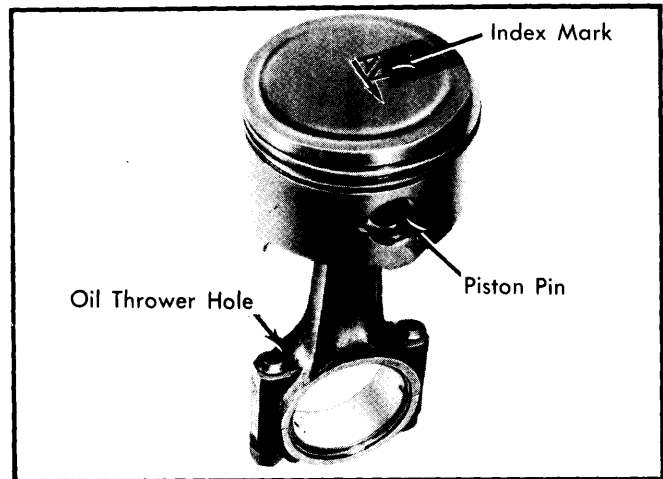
Piston and Rod Assembly with Index Marks Noted
